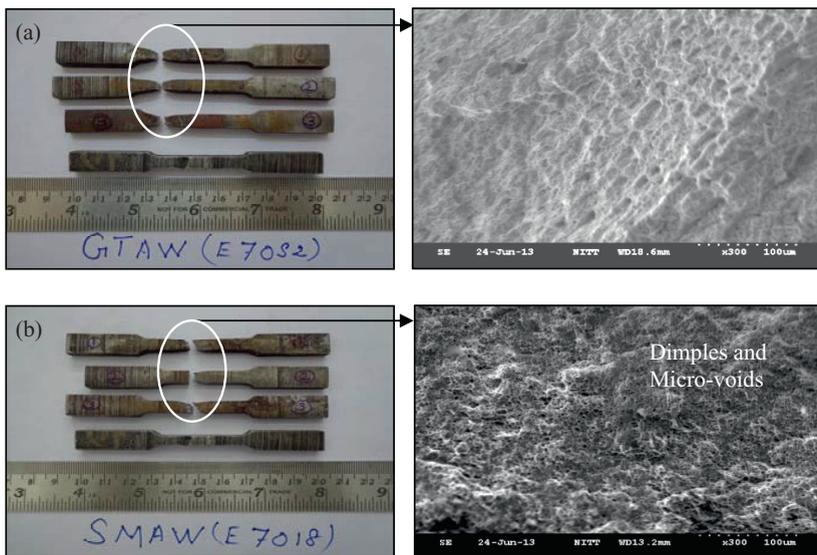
SEM Fractography image analysis of the fractures (a) GTAW (b) SMAW
